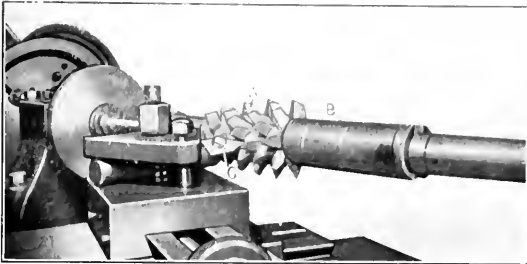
Close View of Machine shown in Fig. 9 illustrating Method of applying Cutting Tool to Tapered Hob
